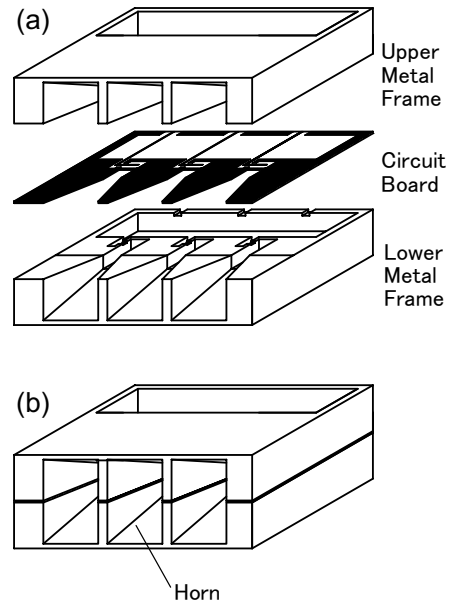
Schematic view of an assembly of horn antenna array. (a) Parts; (b) Completed form.
